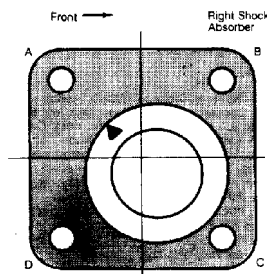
RX7 & 626 Caster & Camber Adjustment Using Strut Support
